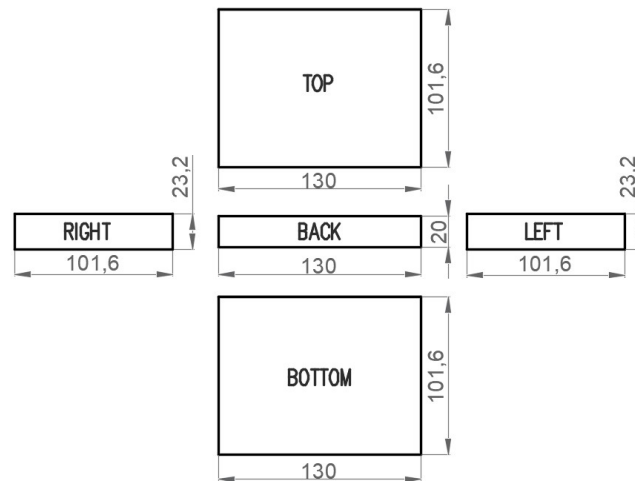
Dimensions of plates of FR4 substrate with an one-side layer of cuprum used for sensor (the dimensions are in millimetres)
